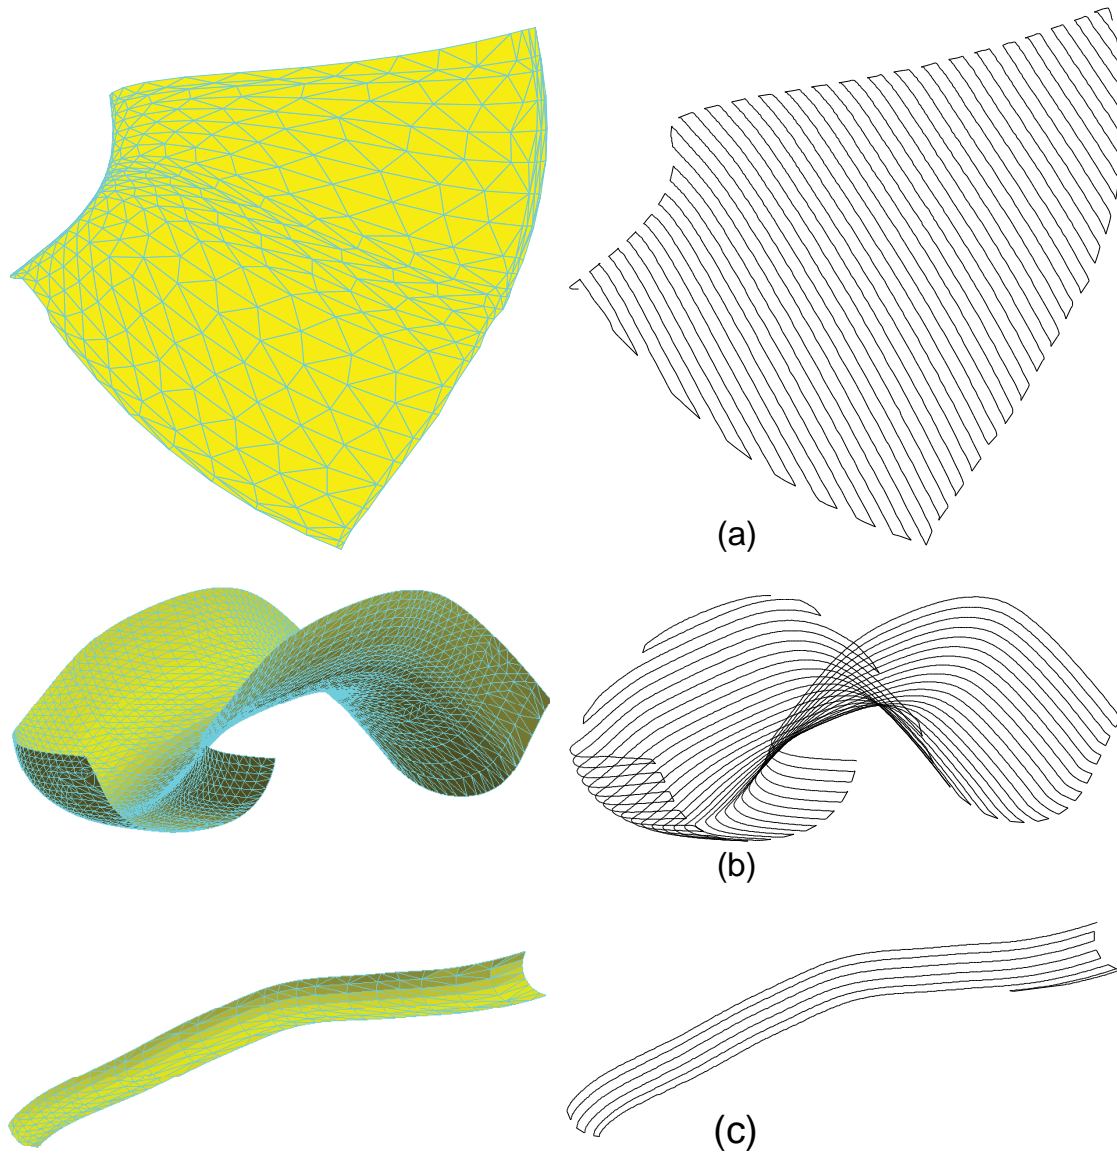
Single scanning path generated on the free-form surface (a) of a turbine blade; (b) inside a channel with irregular shape; (c) inside a fillet.
